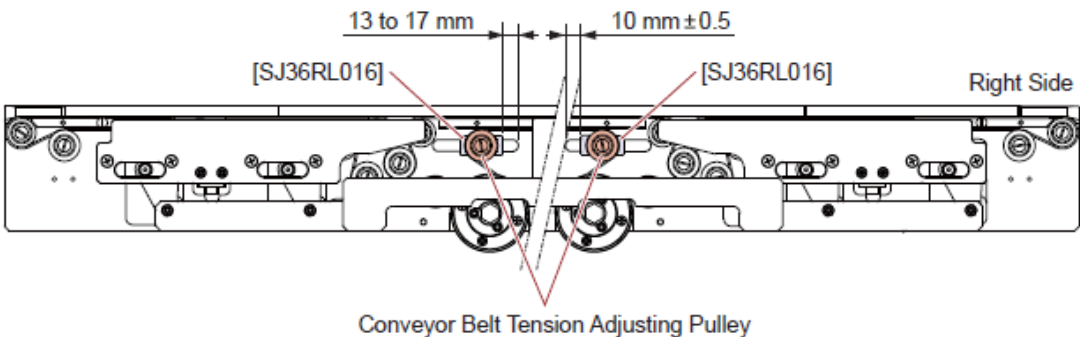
Adjust the Conveyor Belt Tension (BF-3Di-Z1)
